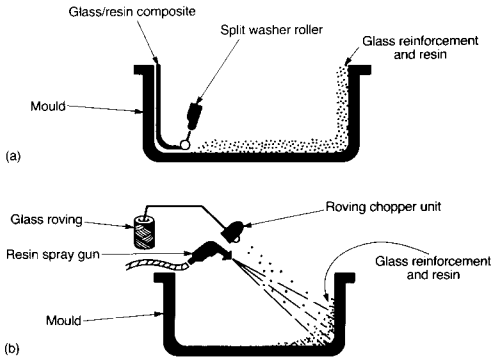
(a) Hand lay-up moulding method; (b) spray-up moulding technique.
